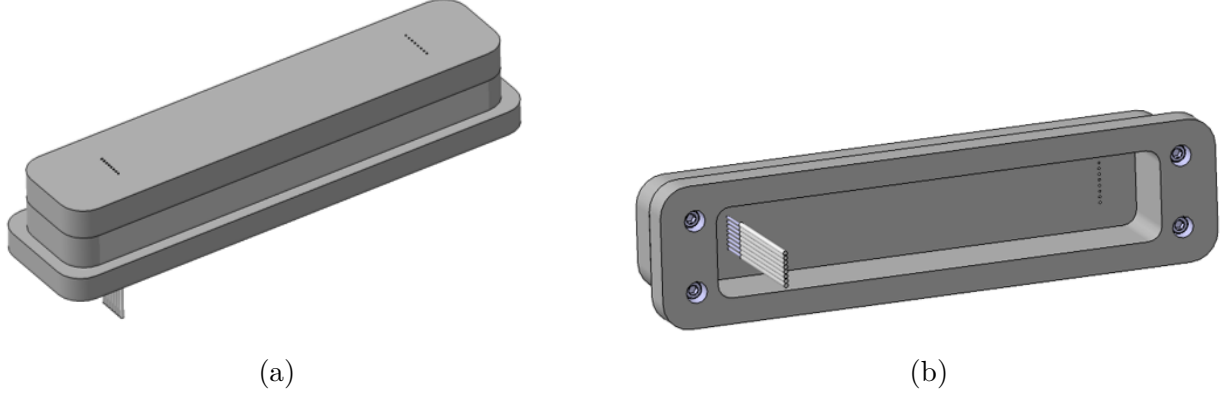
Two-part modular injection plate for arrays of jets in crossflow: (a) isometric view showing top plate with JICF arrays, (b) bottom view with screws and hollow bottom plate.
